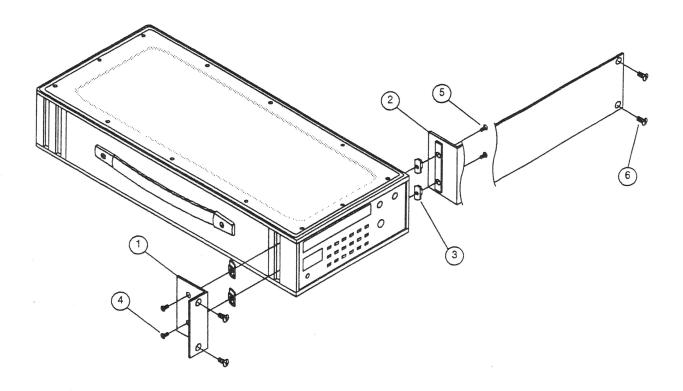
Accessory 011 - Rack Mount Kit for One EIP 625A.
